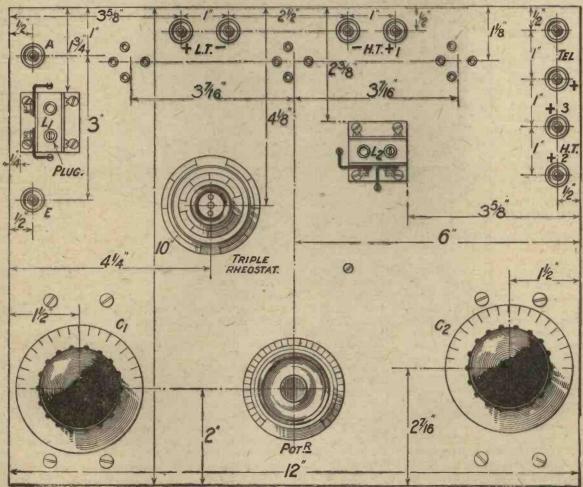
This large size drawing gives all the necessary dimensions for drilling the panel. For those who prefer it, full size blueprint No. C1014A may be obtained, price 1/6 post free.
